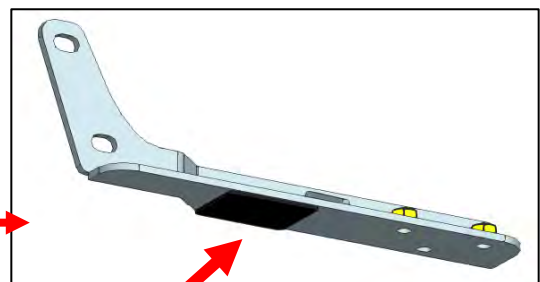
Install the DS mounting bracket 1 using the double bolt plate
